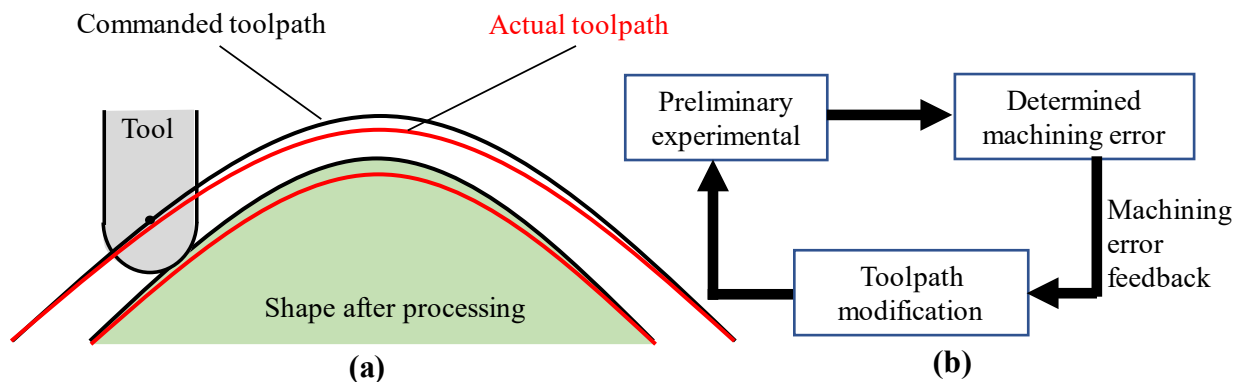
(a) Machined shape error, (b) Traditional process to improve machining accuracy
